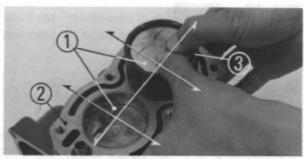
① Pistons 3 Piston slider 2 Cylinder block
